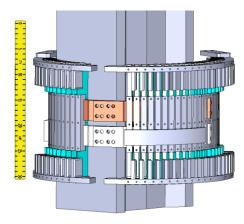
CAD drawing of eddy current testing tool with encircling coil and array of GMR sensors placed around a power pole. Excitation coil shown brown, blue shown PCB's containing magnetic sensors.
